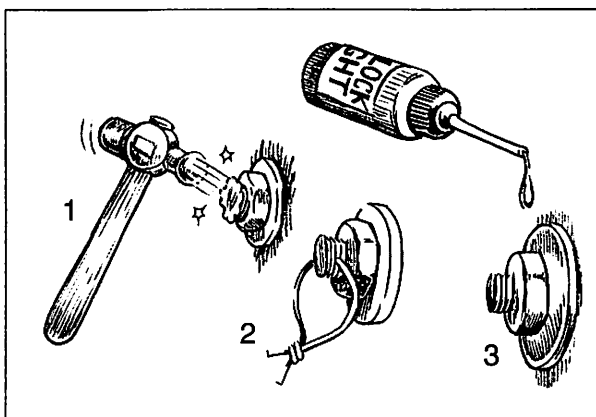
To secure nuts so they will not back off the rod, they can be 1) peened with a hammer, 2) secured with a locking wire, 3) or fastened with locking fluid.
